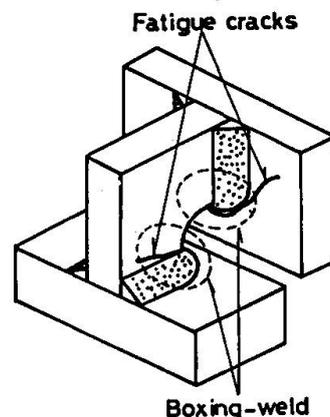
Fatigue cracking initiated at boxing-welds
